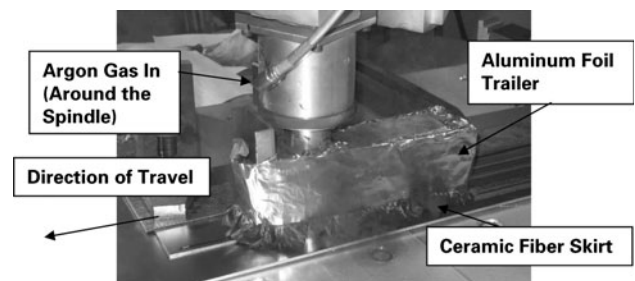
A simple “trailer” is used behind the FSW pin tool & spindle to shield the weld from atmosphere with argon gas to prevent oxidation during welding and cooling
